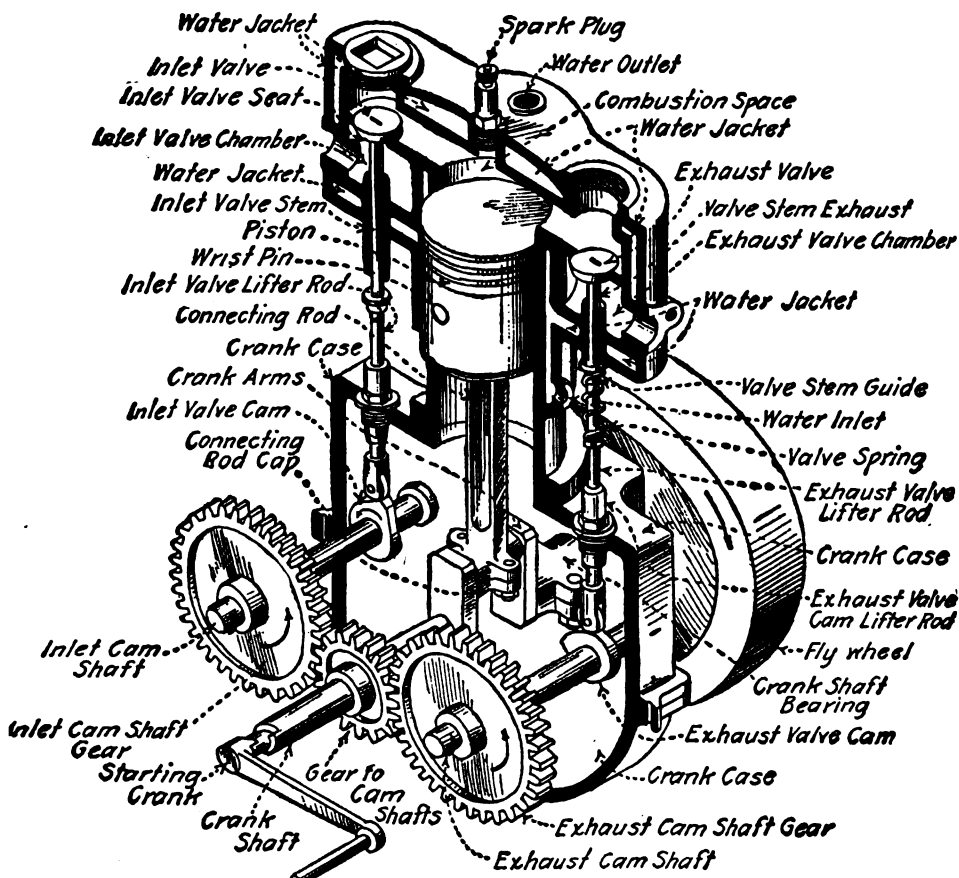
Diagrammatic view of one cylinder of a gas engine with connecting parts, partly in section to show internal arrangement.
